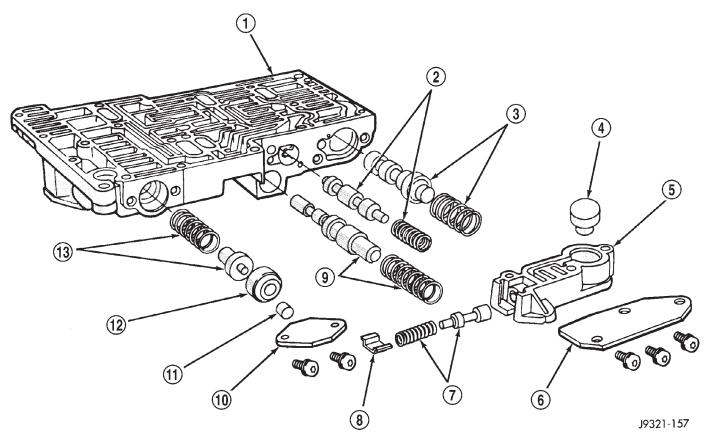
Upper Housing Shift Valve And Pressure Plug Locations
